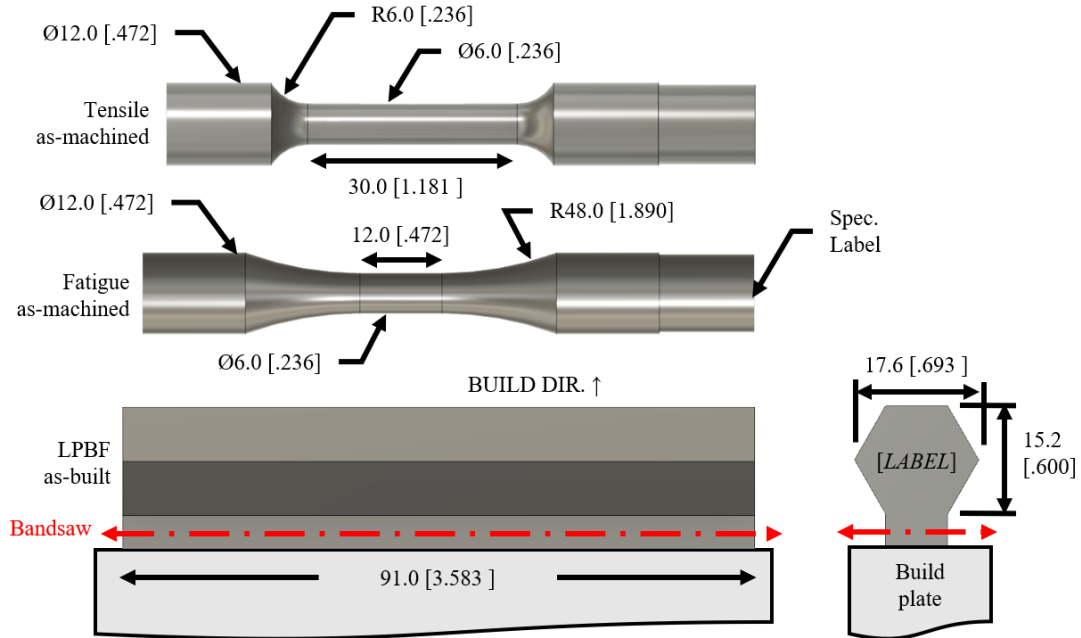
Top) As-machined tensile specimen geometry. Middle) As-machined fatigue specimen geometry. Bottom) As-built universal specimen design, in relation to the build plate. All unbracketed dimensions are in [mm], and bracketed dimensions are in [in].
